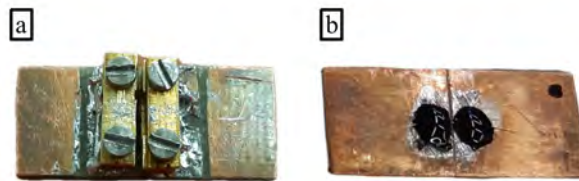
Photos of samples with different fastening mechanisms (a) *Sample fastened by copper clamps with their base soldered on top of a PCB board and the top part* (b) *Sample with the gold wire fixed by two epoxy dots to fasten.
